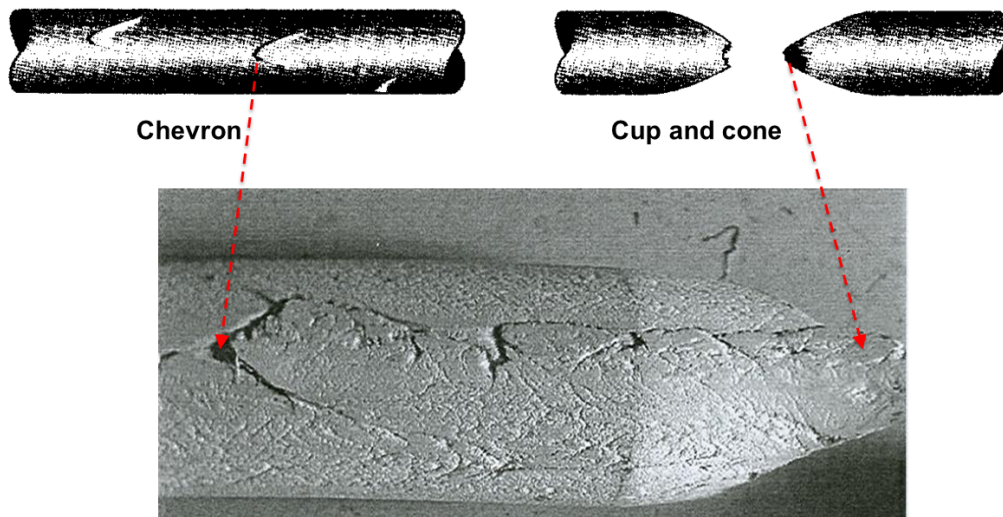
Cracks observed during wire drawing on the studied stainless steel [Vachey, 2011].
